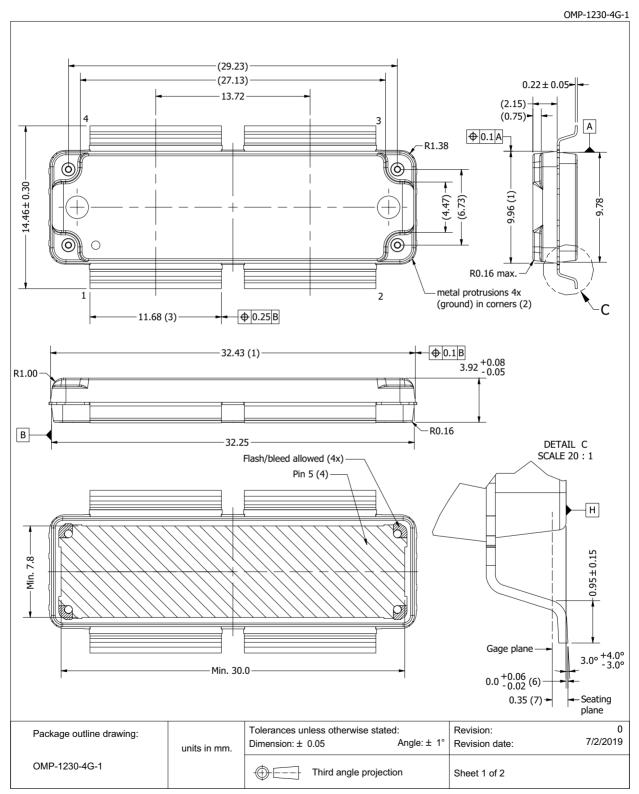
Package outline OMP-1230-4G-1 (sheet 1 of 2)
